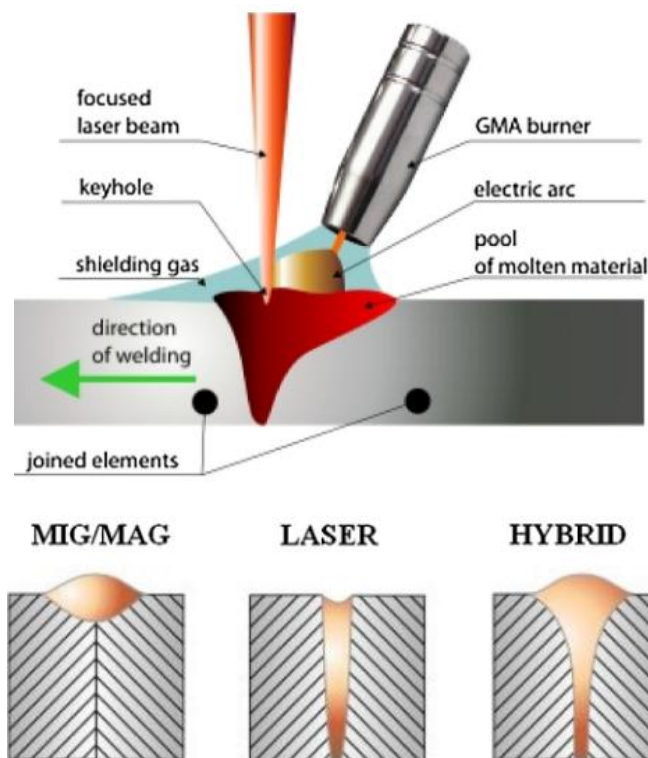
Scheme of hybrid laser arc welding process and patterns of formation of weld beads during arc welding, laser welding and hybrid laser arc welding (Acherjee, 2018a).
